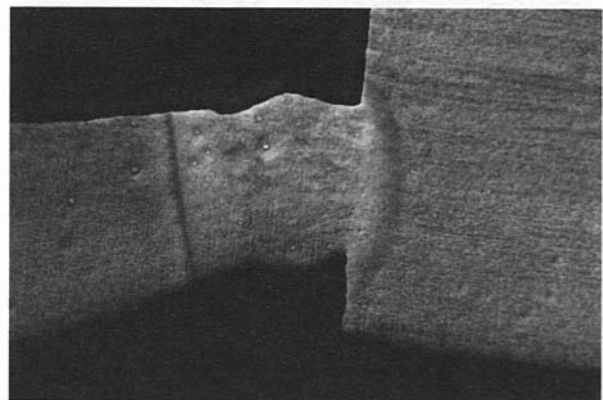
Macrograph showing the new section, which was EB welded to the blade, magnification 20 $\times$
